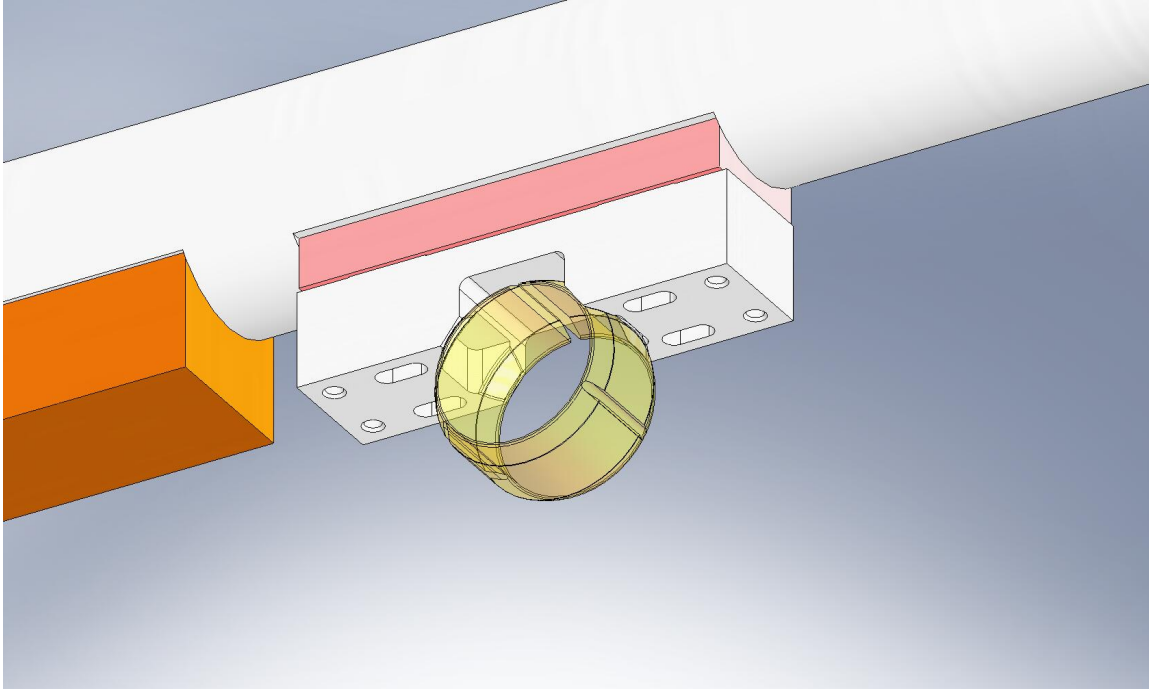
Detail of ball joint Clamp proposed for both new Crossbeam concepts. A Sleeve (shown transparent in this image) would first slip over the cylindrical end of the Support Tube. The Sleeve would have spherical surfaces cut on the outside, which would mate into four spherical pads of equal radius and common center, cut into the Clamp. Note, the Clamp is significantly shorter than the existing Crossbeam's Clamps, which should help improve the system's overall stiffness. Instead of making the Clamp from Aluminum (as the old Vee-style is), we would use a stiffer material (perhaps stainless steel).
